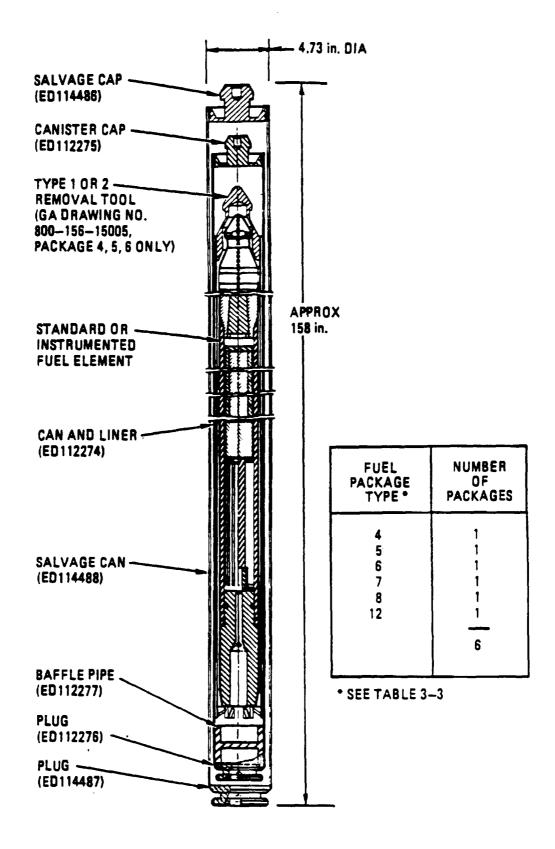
D.8. PB1/1 failed fuel element in storage canister with removal tool in salvage canister.
